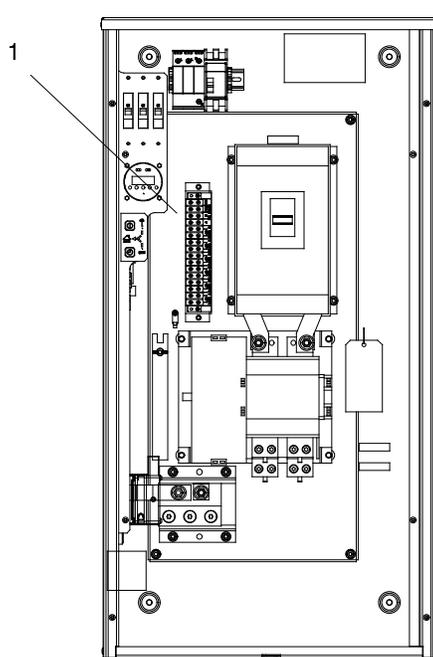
Typical Load Shed Kit Mounting Locations, Model RDT with Mounting Holes and/or Hardware
